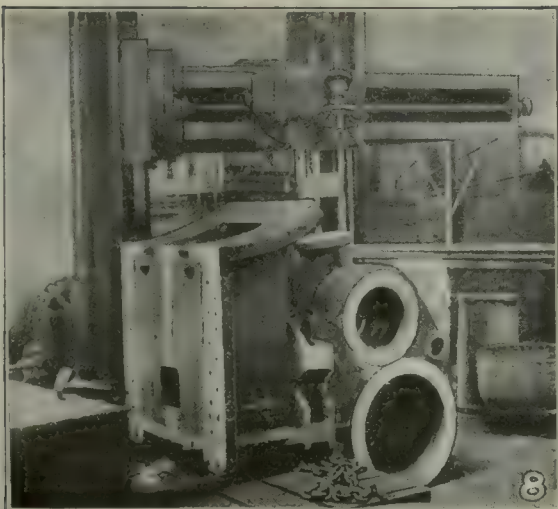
CYLINDER DRILLING OPERATION. FIG. 9. REBORING A VALVE CHEST ON A LARGE ENGINE
